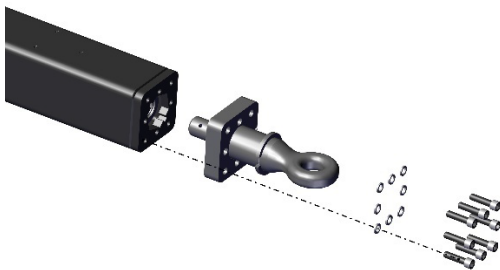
The wheel packer is connected to the end of the drawbar by first removing the towing eye. The flange of the packer fits into the same bolt holes at the end of the drawbar. It is absolutely essential to ensure that the bolts do not loosen and that they are sufficiently strong. Hardness 12.9, tightening torque 375 Nm, use a Nord-Lock washer.
